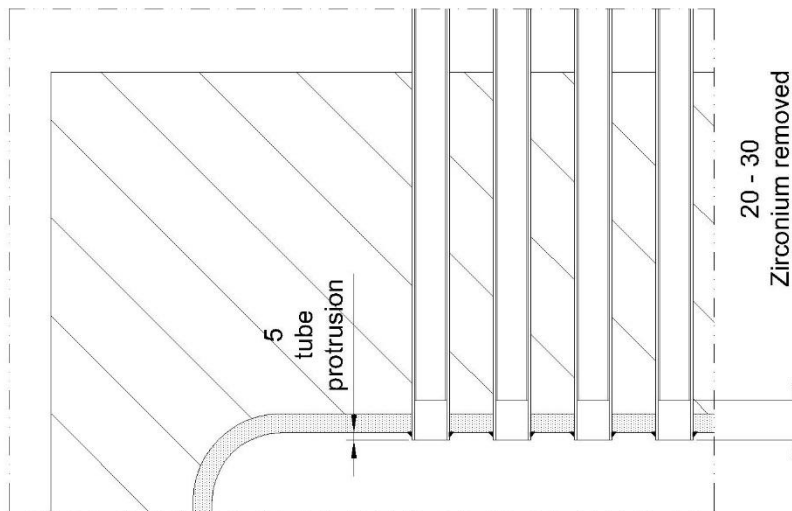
LAYOUT OF THE BIMETALLIC STRIPPER
